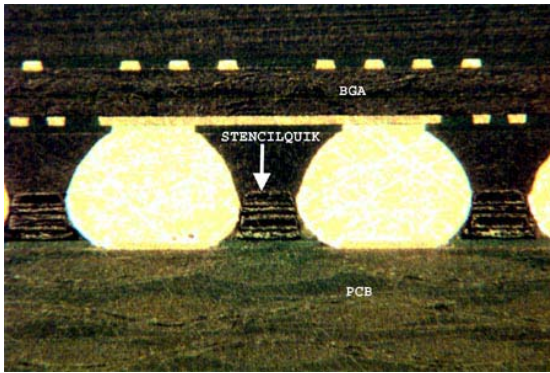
Semi-permanent Stencil, BGA and PCB Cross-Section.
